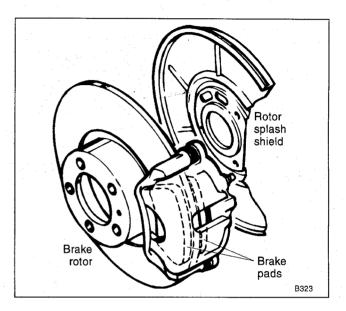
Disc brake pad wear can checked through opening in caliper.
